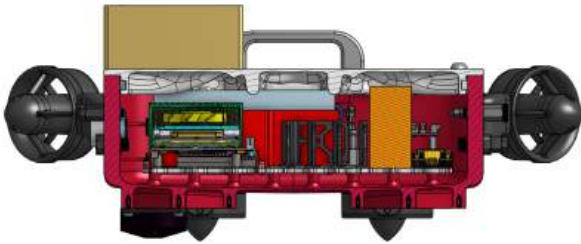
Cross-section view of the hull. Note the M6 mounting hole grid in the equipment bay. The electronic components are mounted on customizable interposer plates (shown in gray).
